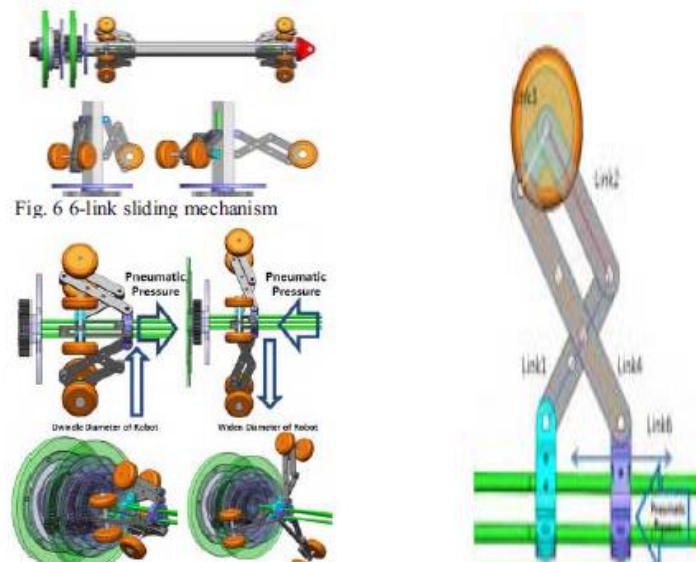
The mechanism for the in-pipe robot extend and contract [6]
